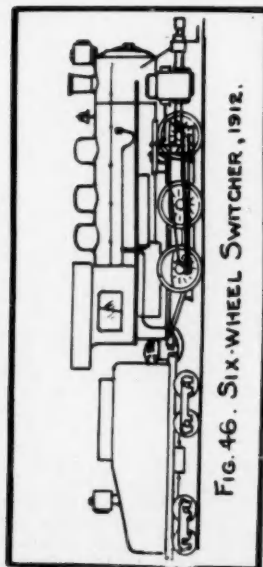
SIX-WHEEL SWITCHER, 1912.
